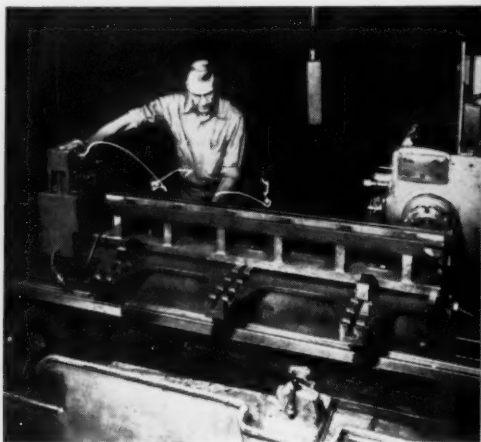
Motion study: loading and clamping a part on a magnetic type milling fixture.
